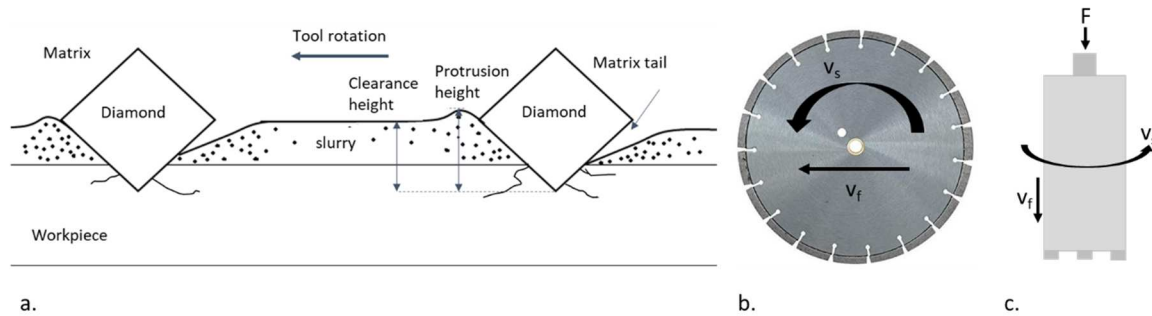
a. Representation of the interactions between the tool and the workpiece during circular sawing and drilling operations (modified from [8]); b. example of circular sawing; c. example of a core drill ( $v_f$  = cutting speed;  $v_s$  = peripheral speed,  $F$  = normal load)
